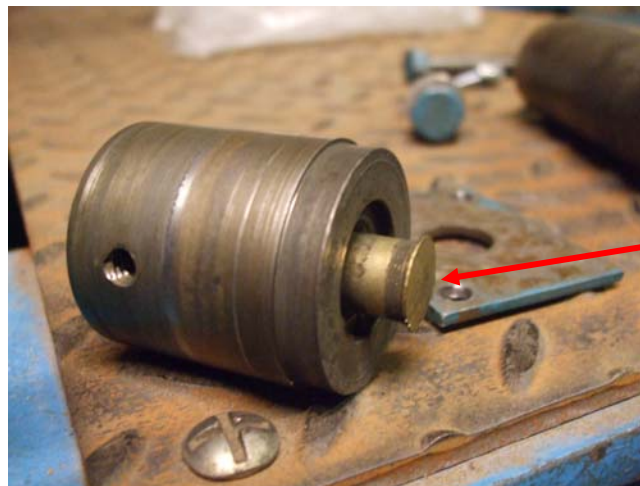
& 9 show the brass bullet and housing. Figure 10 typical damaged parts.
